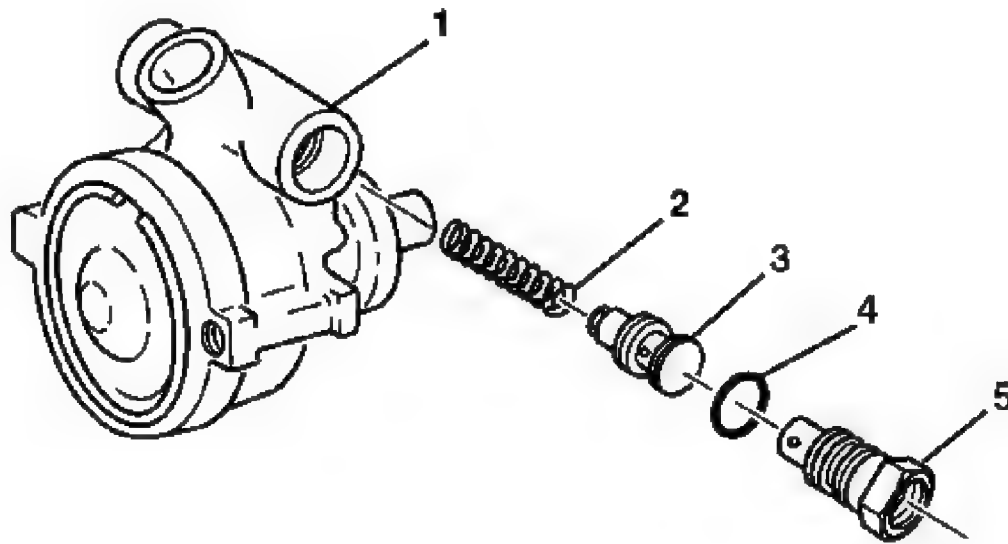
Exploded View Of Power Steering Pump Flow Control Valve (CB Series)
